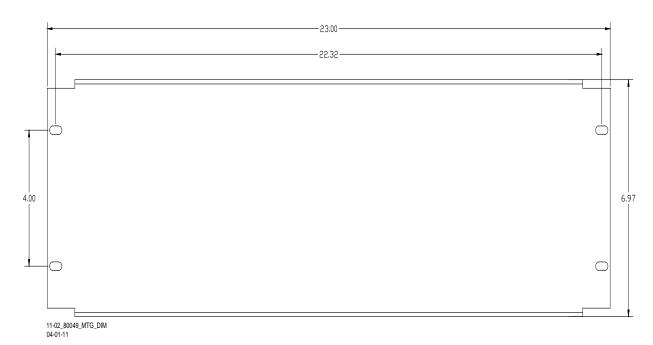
DC Shunting Enhancer Panel Mounting Dimensions
